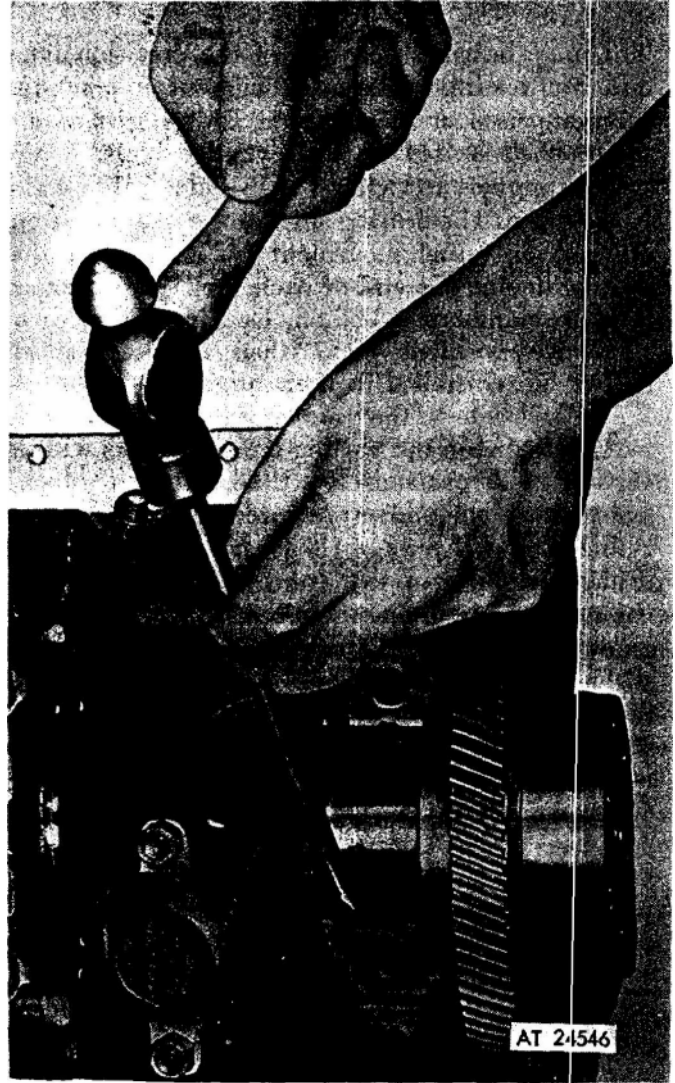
Removing rear main bearing upper shell— crankshaft in place
